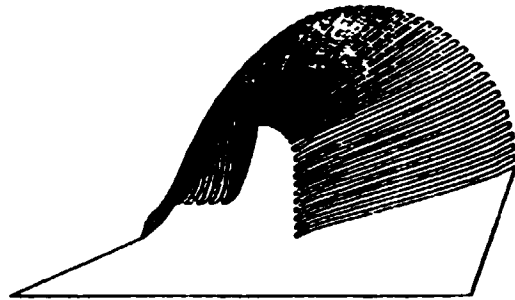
Cutter path for NC machining of the EDM electrode for the streamlined " T "-shape die.
